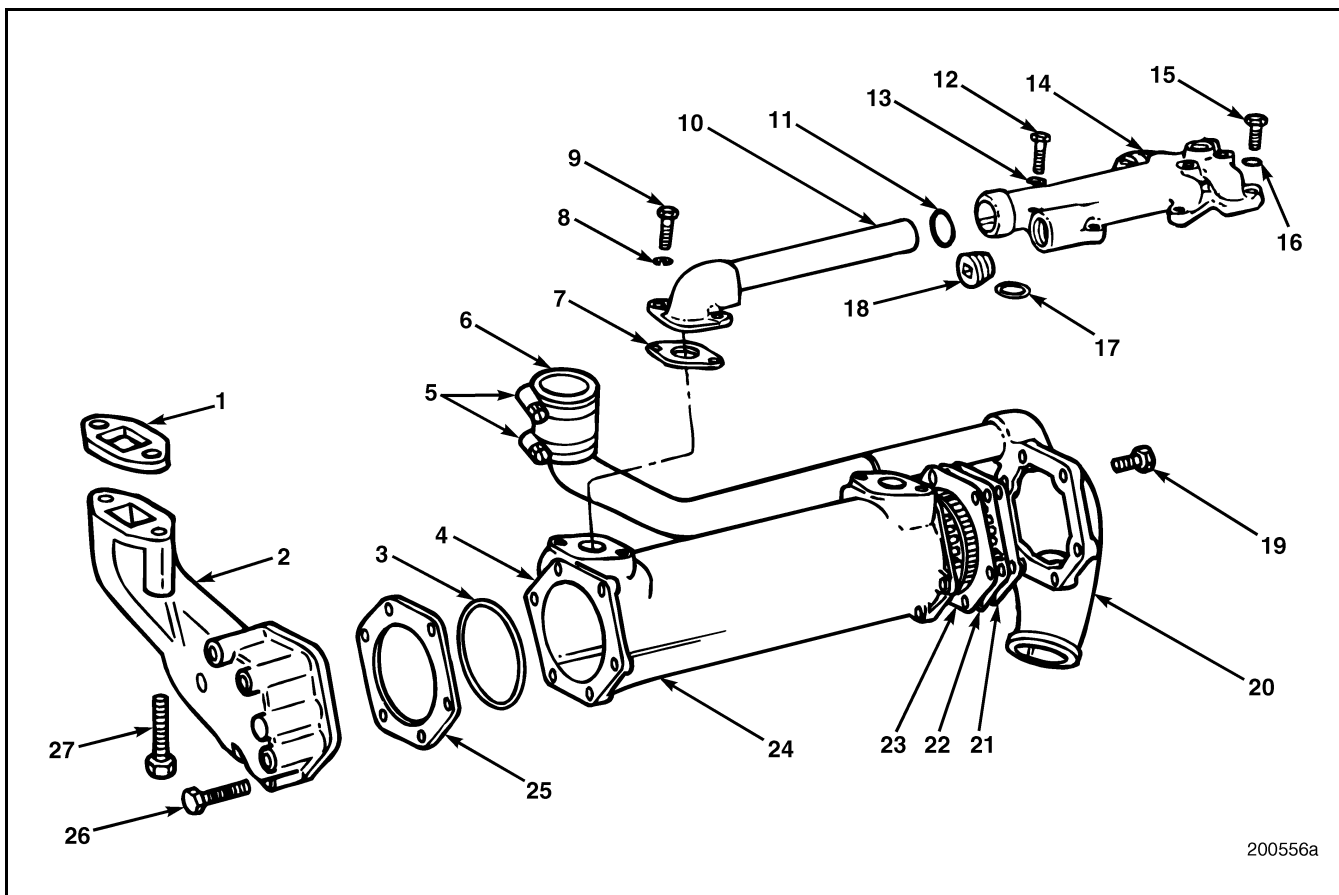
Removable Bundle-Type Oil Cooler Assembly
